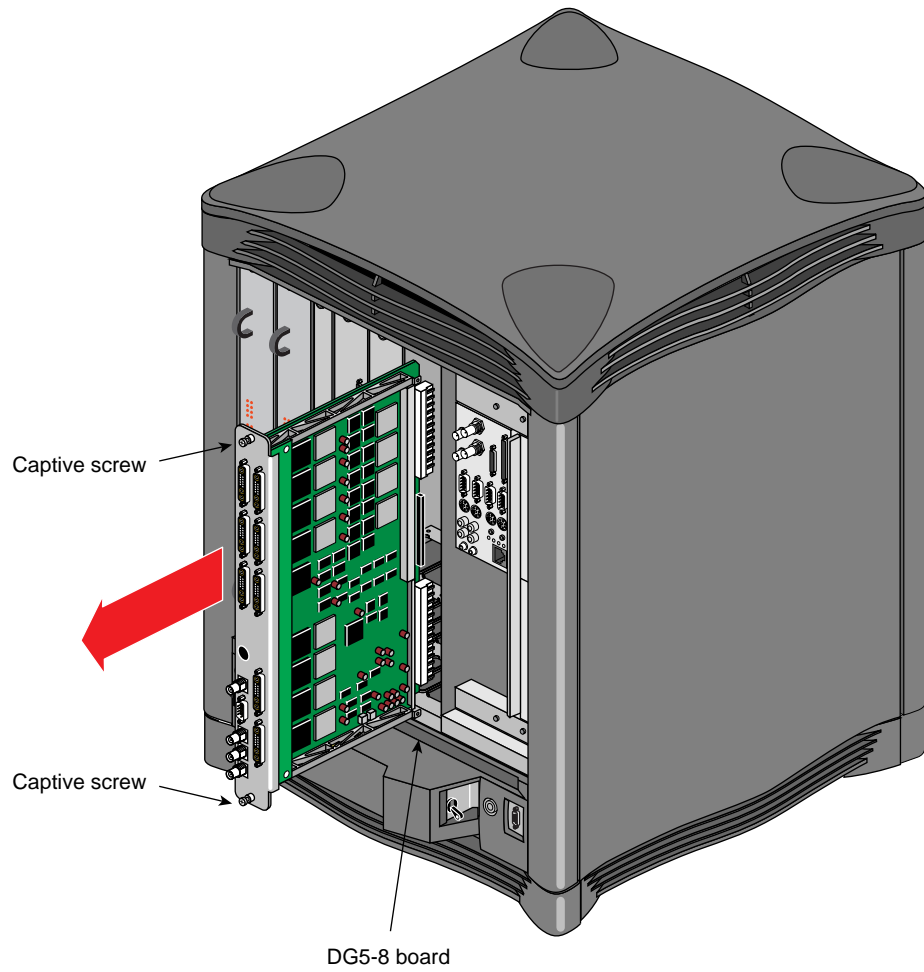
Graphics Board Removal and Replacement (DG5)
